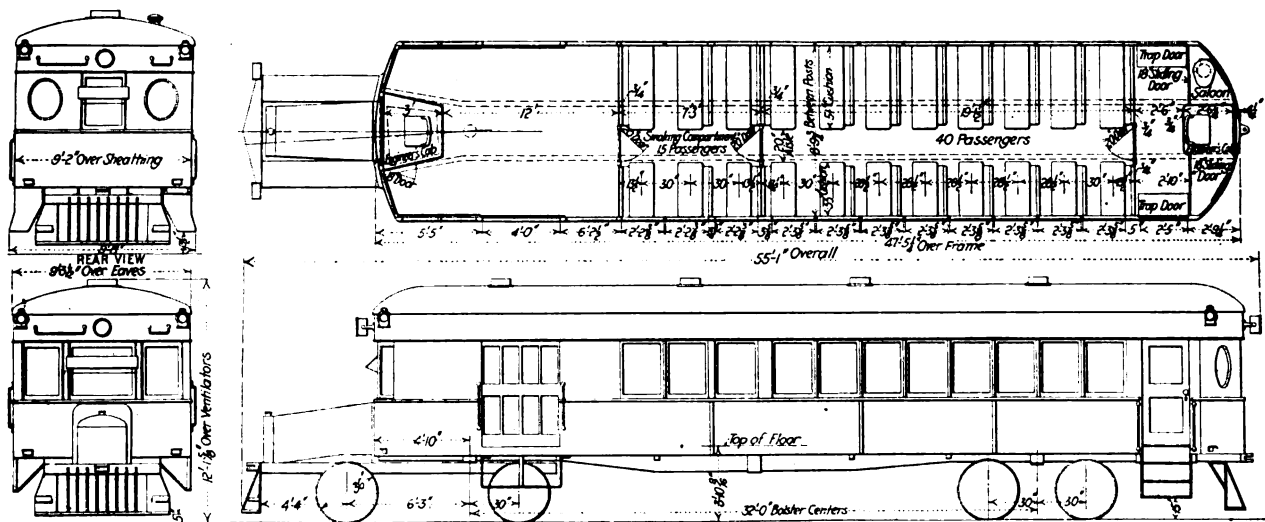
PLAN VIEW OF A 55-PASSENGER MOTOR RAILCOACH
